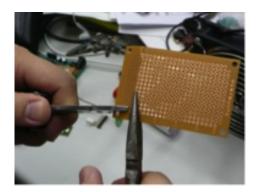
Reducing the universal board size to fit the Arduino board by cutting it.
